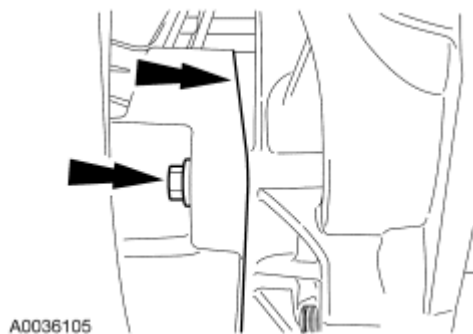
Locating Transfer Case Bolt & Transfer Case Unit
